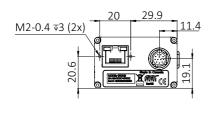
Prosilica GT1930 C-Mount standard format housing dimensions
